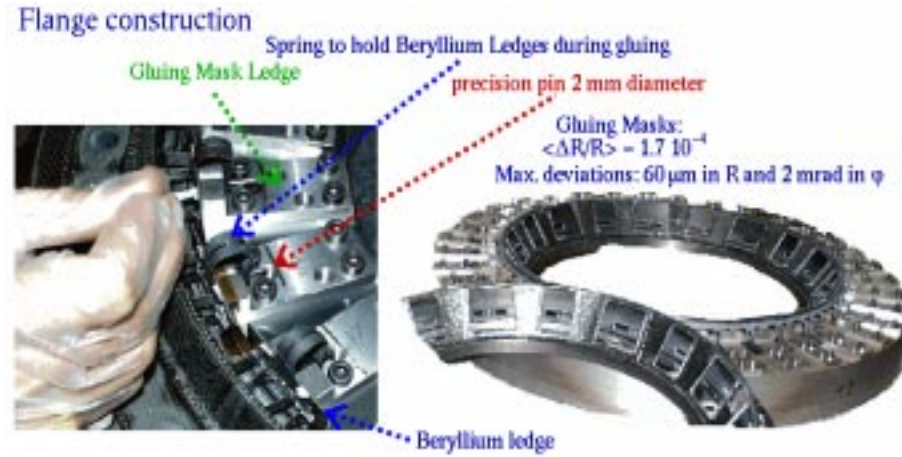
The biggest precision gluing mask (on the right) used for flange construction. On the left a detail of a smaller gluing mask during the beryllium ledges gluing. We distinguish the two precision pins that locate the mask ledges, the precision pins that gives the φ positioning to the beryllium ledges and the specials springs that hold them during the gluing operation.
